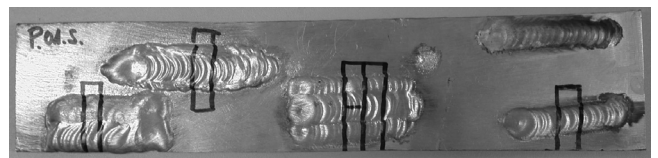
Overview image – sample welding plate – feller material: CASTOWIG 45859W
